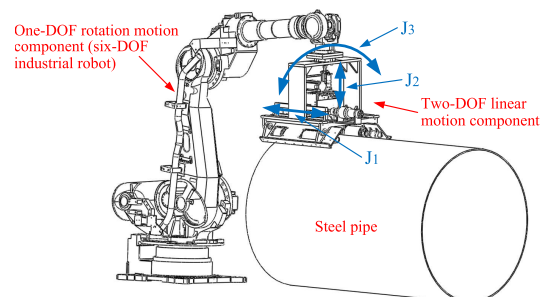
Proposed automatic seam bead grinding robot manipulator.
